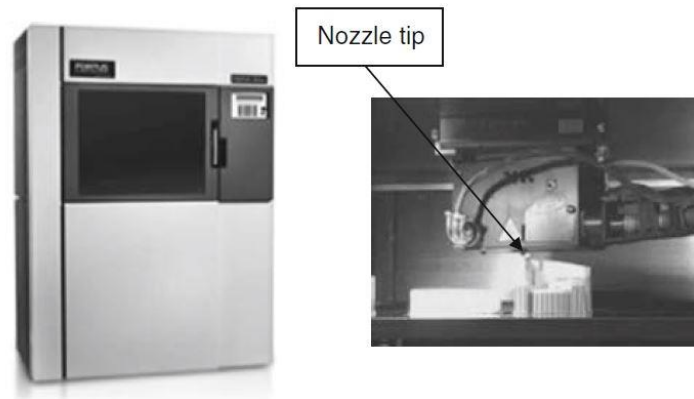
Typical Stratasys machine showing the outside and the extrusion head inside
